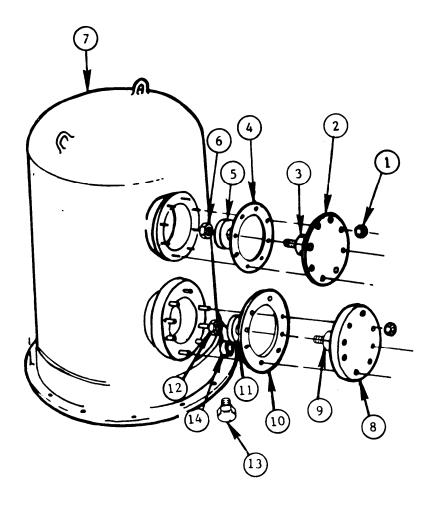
Multimedia Filter Assembly Hand-Hole Cover
